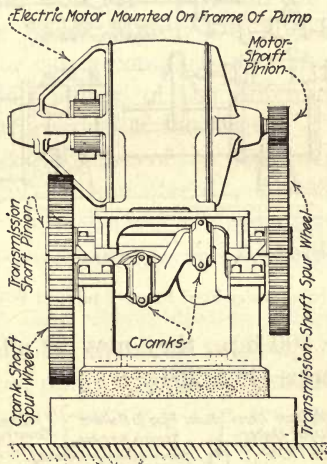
View Of Crank-End Of A Motor-Driven Boiler-Feed Pump.
